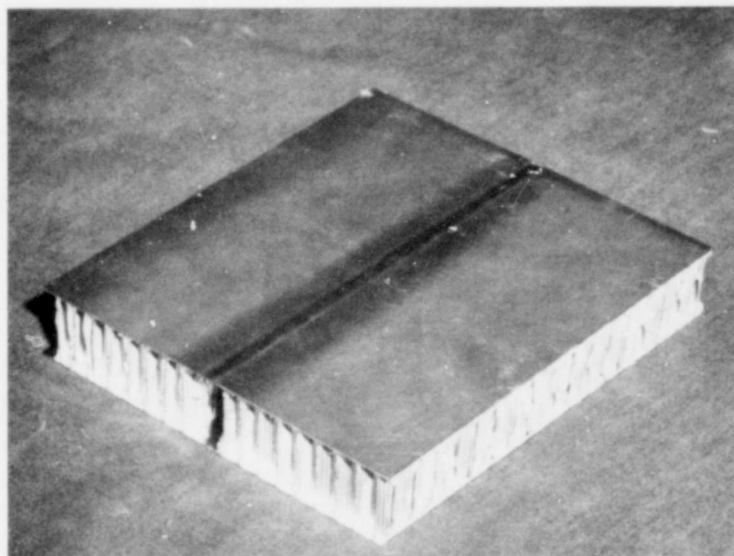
POST-BRAZE WELDMENT
